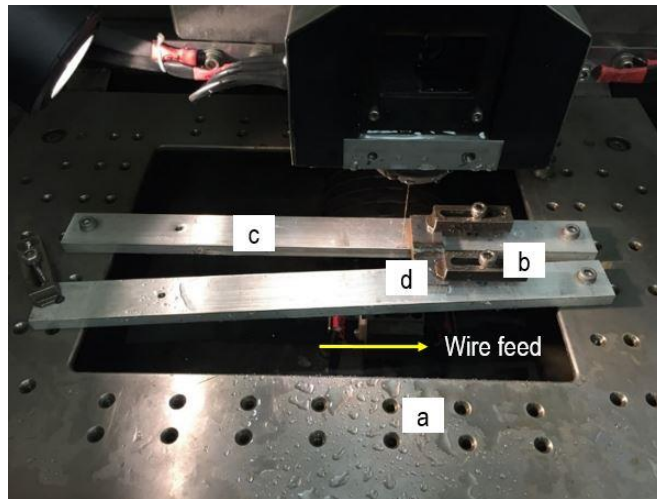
Section along X direction. (a) EDM table, (b) Clamps, (c) Supporting beam, and (d) Welded workpieces
